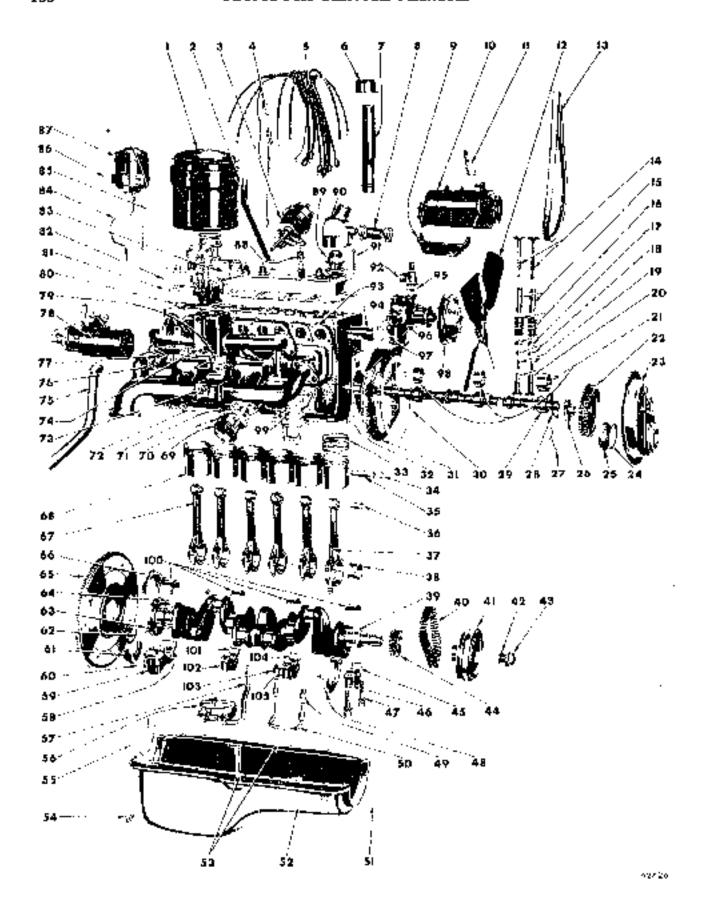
Engine (Disassembled View) (1942 Model, Typical of 1936-41 Models)
